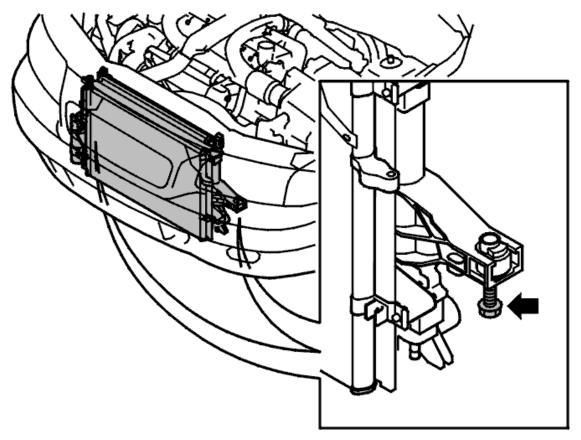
Identifying Lower Mounting For Air Conditioning Aggregate Courtesy of VOLVO CARS CORPORATION
